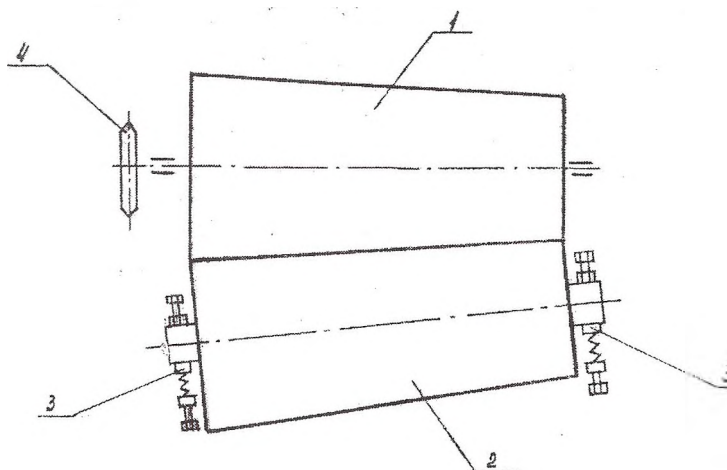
The scheme of flax stem crushing apparatus AP-1A: 1 – upper leading roller; 2 – bottom squeezing roller; 3 - squeezing device; 4 - gear
